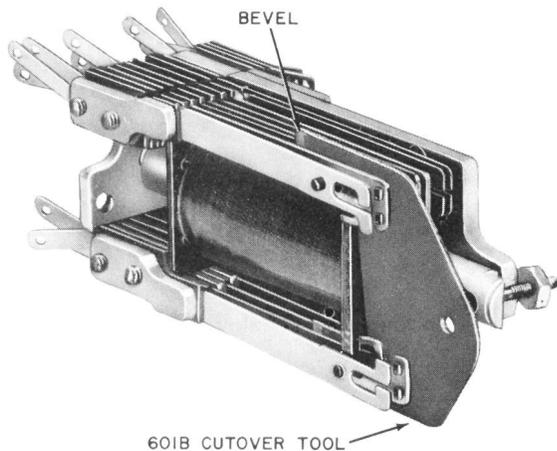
Blocking U676 and U680 Relays for Cutover Purposes
